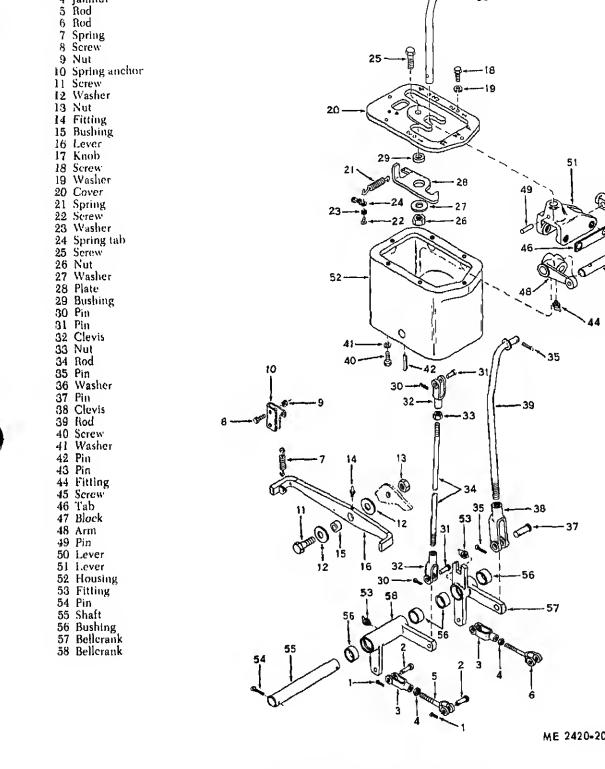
Transmission control levers, removal, disassembly, reassembly and installation (sheet 2 of 2).
